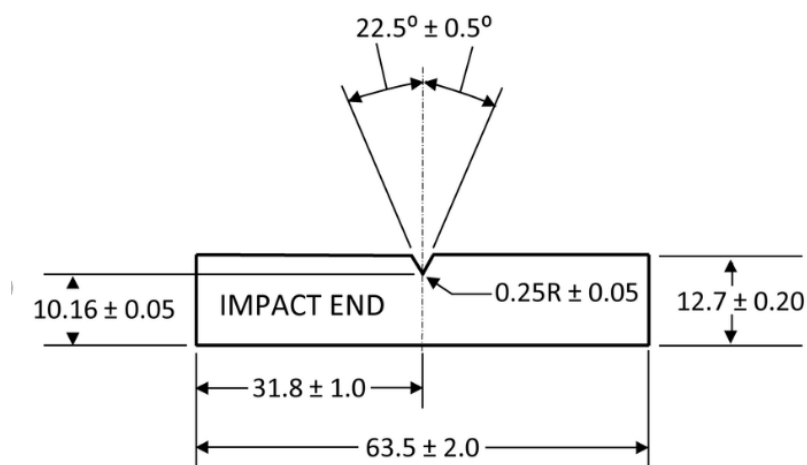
Dimensions of Izod impact test specimen.⁸⁷ All dimensions shown in millimeters.
